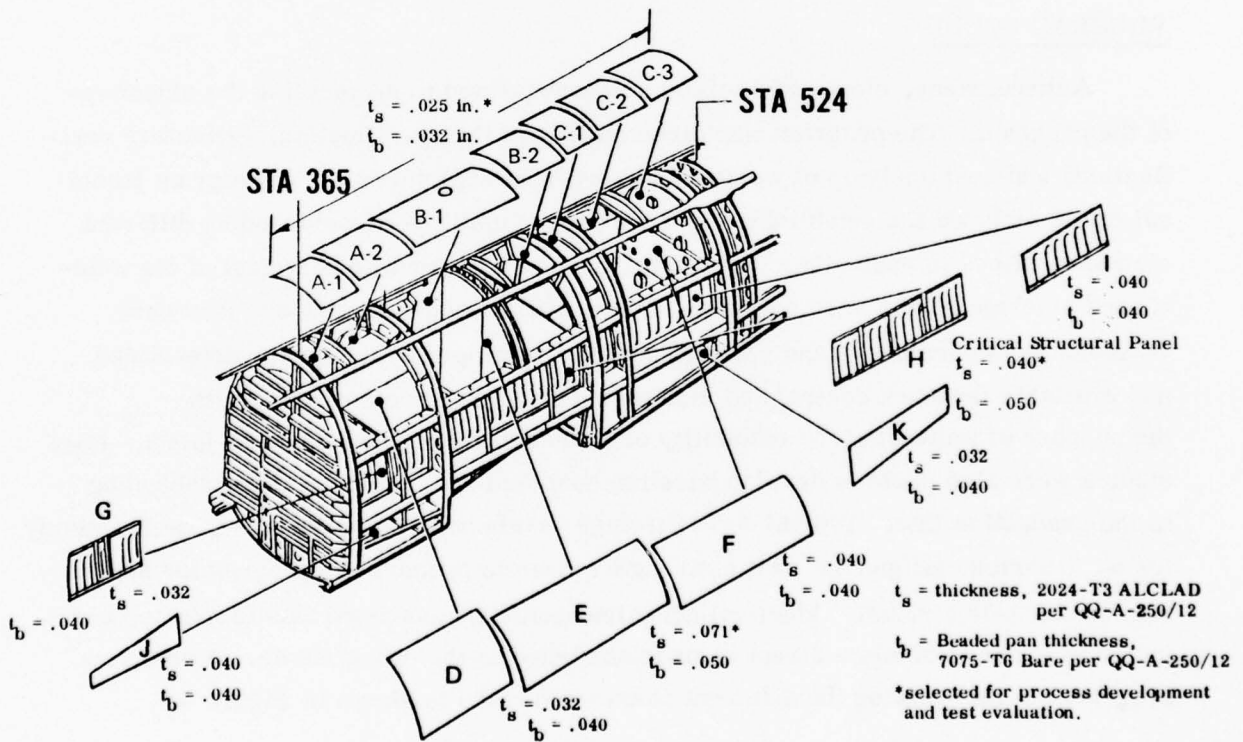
A-10A FUSELAGE CENTER SECTION BEADED PANELS AND MATERIAL THICKNESS
